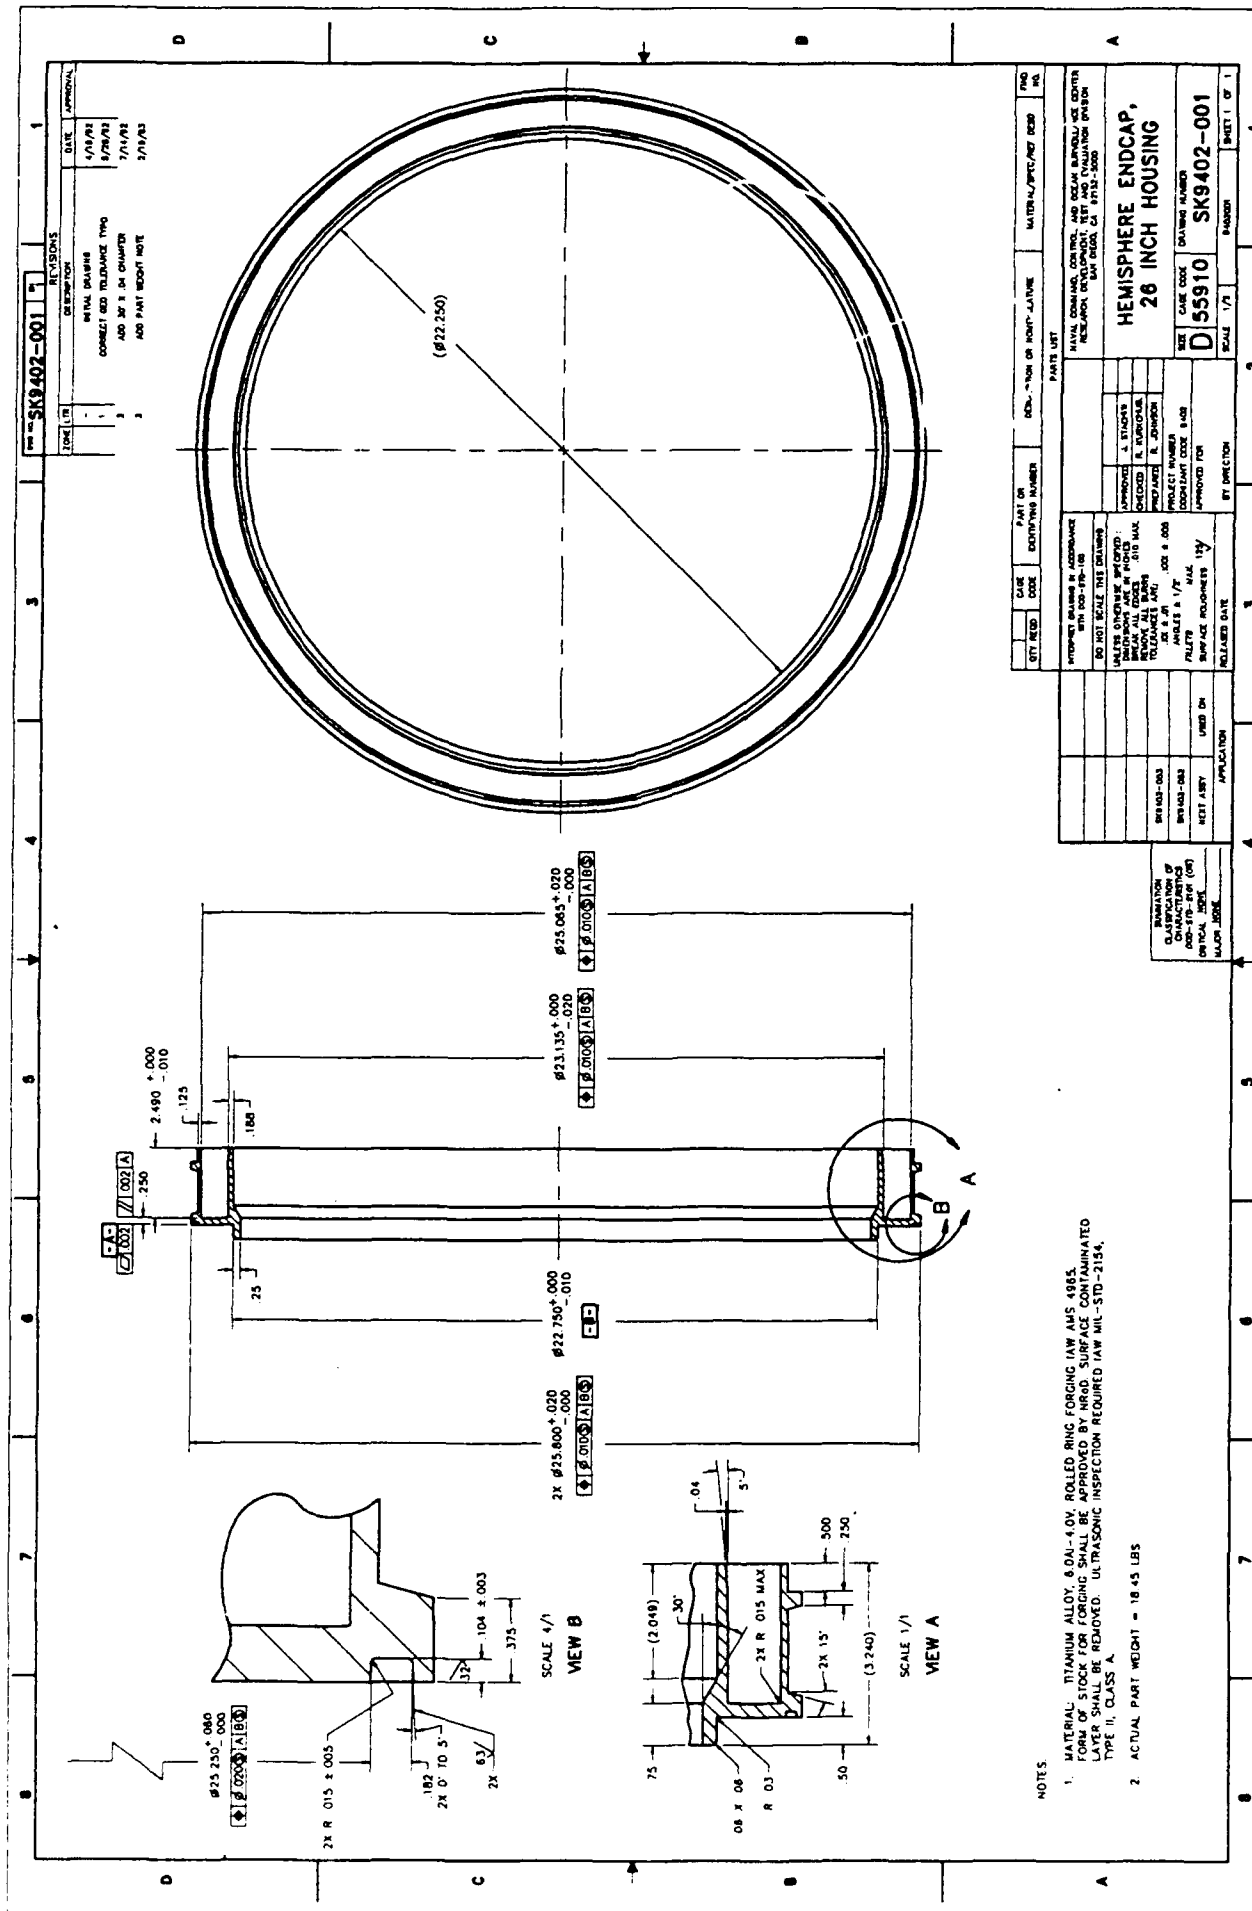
Engineering drawing of the 26-inch-housing hemisphere end-cap joint ring.
